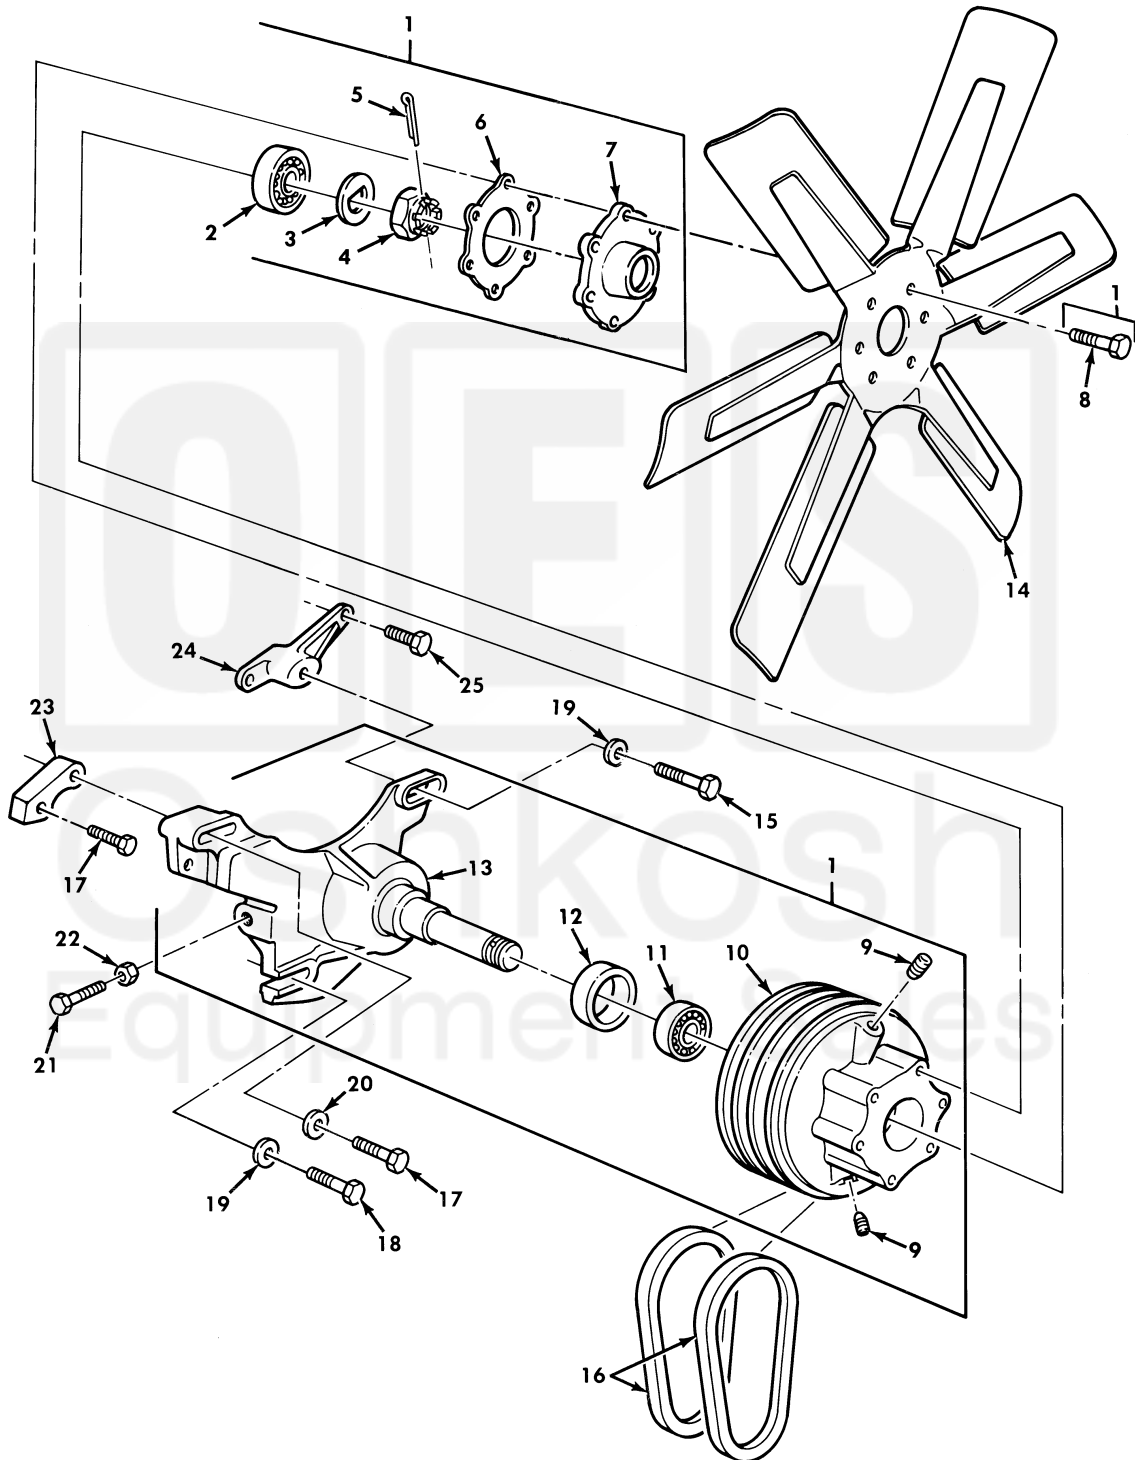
Fan, Bracket, Hub Assembly, Belts, and Mounting Hardware.
